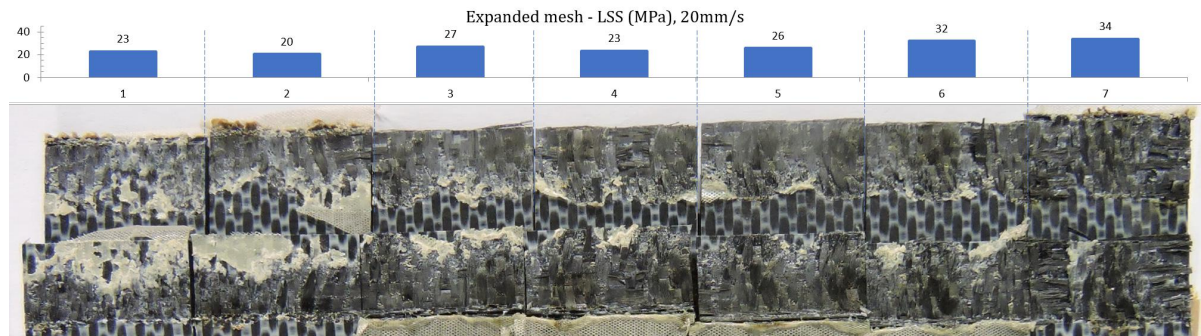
The fracture surfaces at a welding speed of 20mm/s
